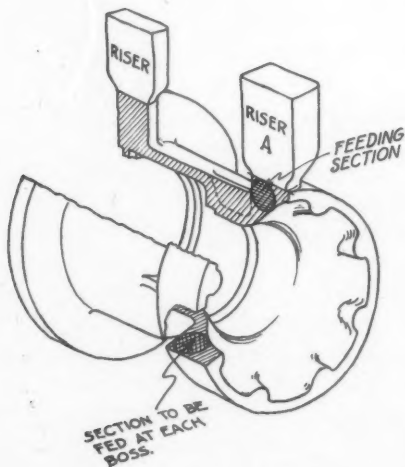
REDESIGN OF CASTING OF FIG. 11, SHOWING ENLARGED SECTION IMMEDIATELY BENEATH RISER A.
